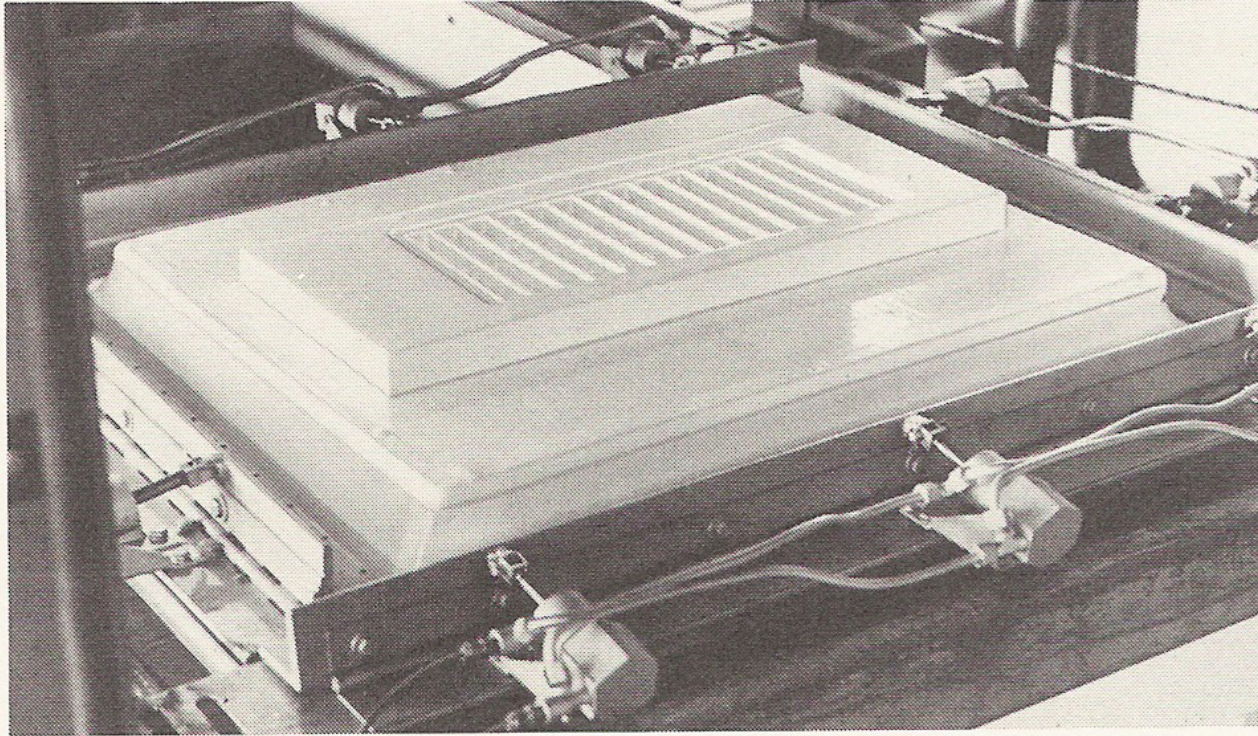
The mold is raised into forming position and the vacuum drawn.
